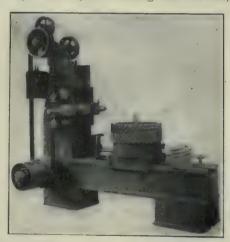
Universia Wood Gear cutting Machine for Cutting Helical Gears or Worms.
